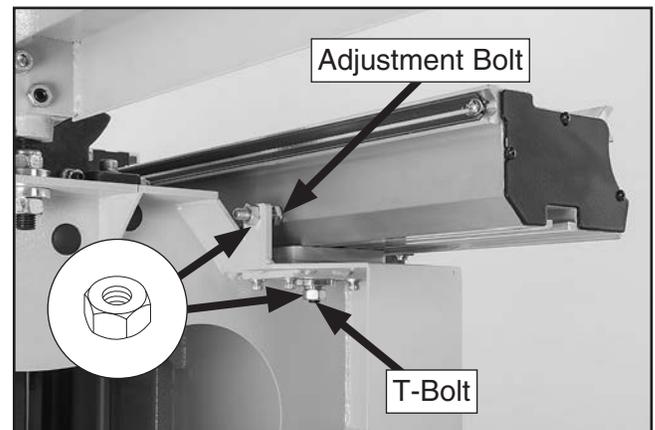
Rear parallelism adjustment bolt and T-bolt.
